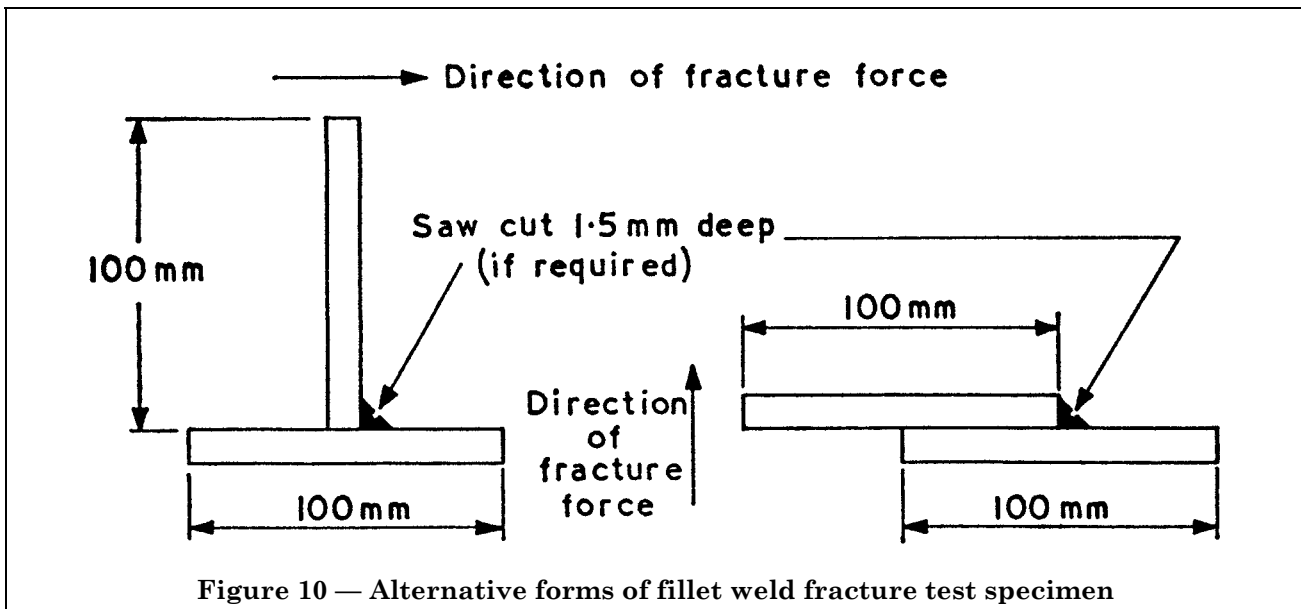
Alternative forms of fillet weld fracture test specimen
